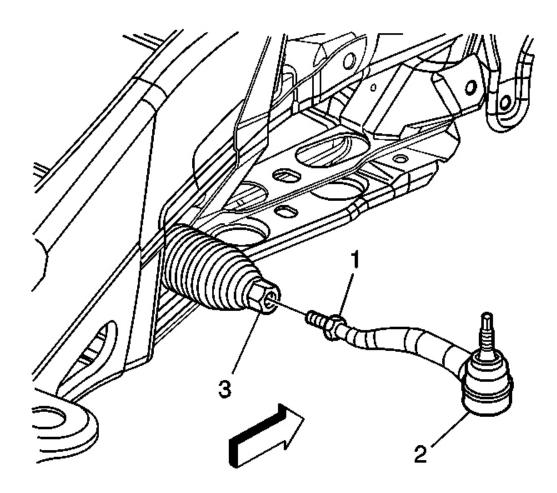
Removing/Installing Outer Tie Rod Courtesy of GENERAL MOTORS CORP.
